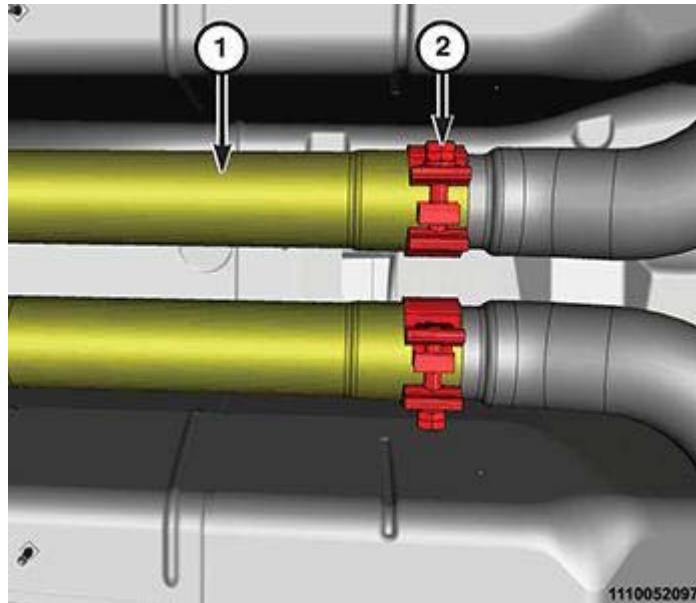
Exhaust Pipe/Muffler, Resonator Assembly & Front Exhaust Pipe Band Clamps
